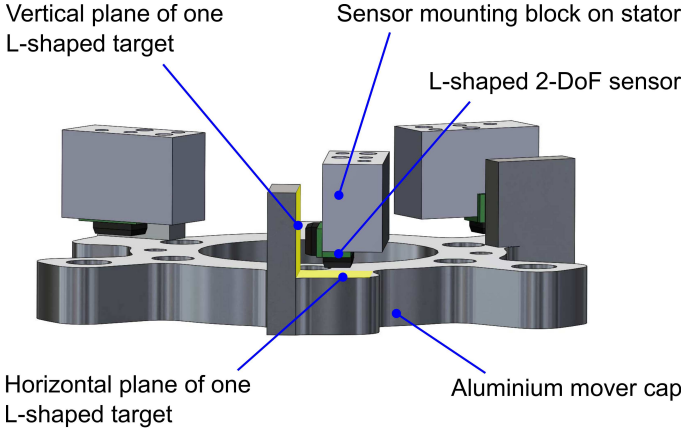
L-shaped sensor and target configuration. The L-shaped target is part of the mover cap which was CNC machined. The L-shaped 2-DoF sensor is mounted on a sensor mounting block. This block is mounted on the stator.
